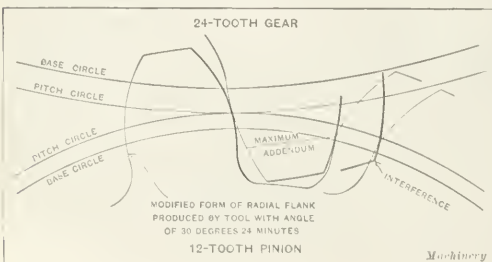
Teeth with Full Flanks generated by Minimum Angle Tool working on Twelve-tooth Pinion and Twenty-four-tooth Gear
